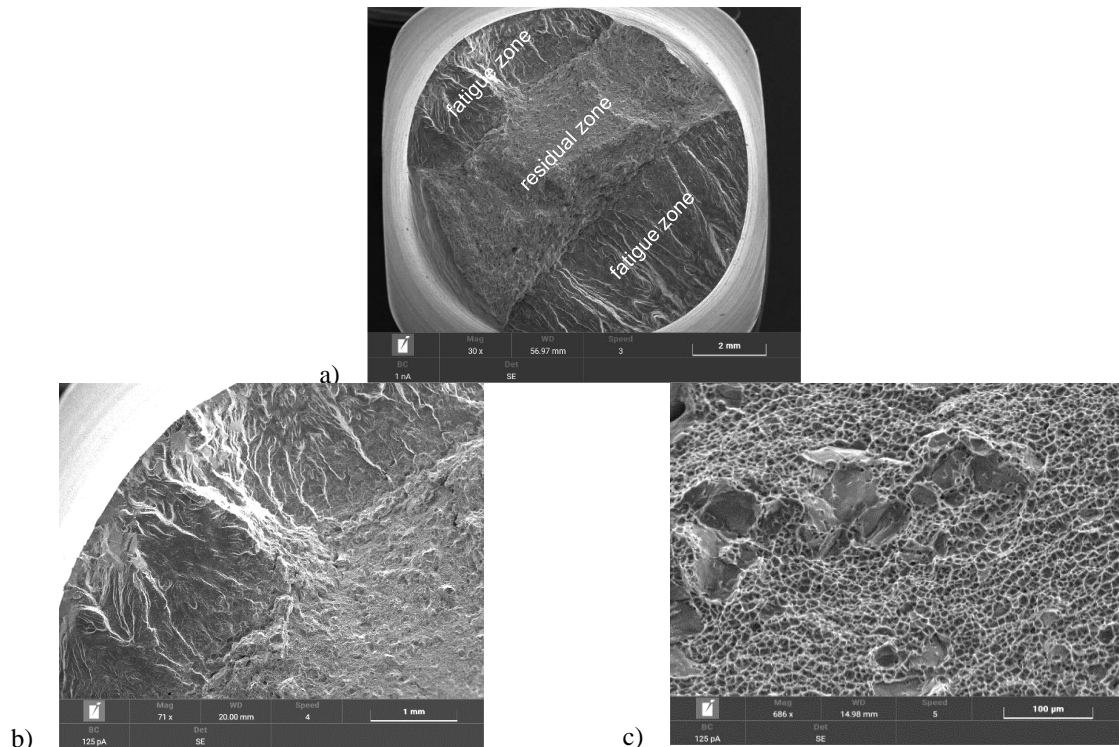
Fatigue fracture of the alloy after T6 treatment caused by bending, a) fracture morphology, b) surface in the area of the fatigue zone, c) surface in the area of the residual zone (specimen 8 –14 314 cycles).
